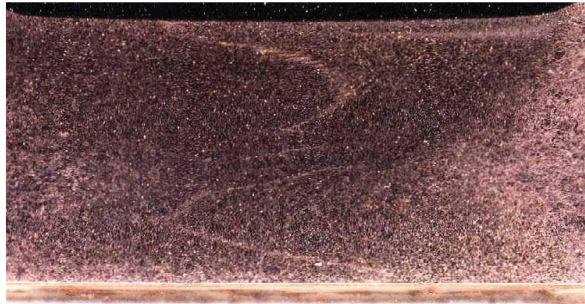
Entrapped oxide particle lines in a double-sided Cu-OF FSW weld.
